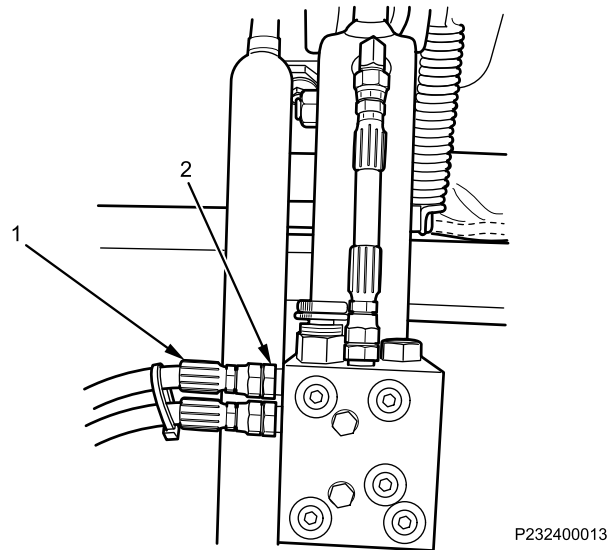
Hydraulic Power Module-to-Hydraulic Cylinder Hose Removal.
